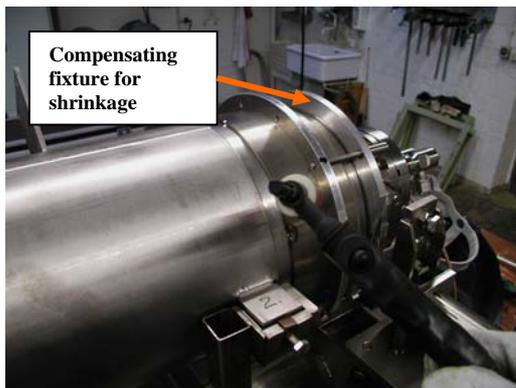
Tacking and adjusting sliding collar / Joint 4
